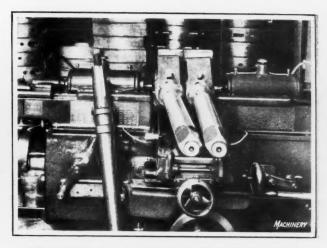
Milling the Keyway in the Hub End of Two Axle Shafts
